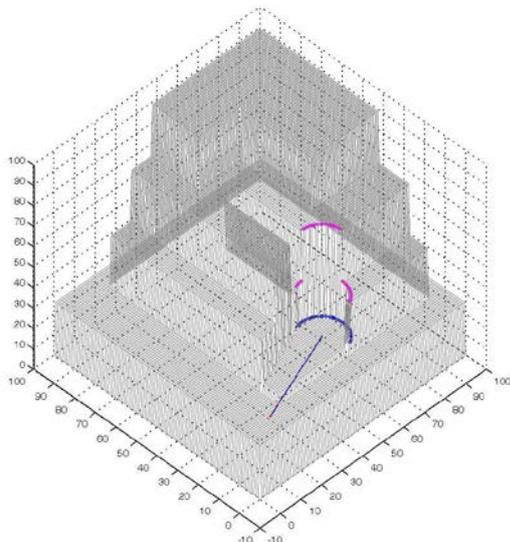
Bottom and top contact lines at the end of the first tool path segment
